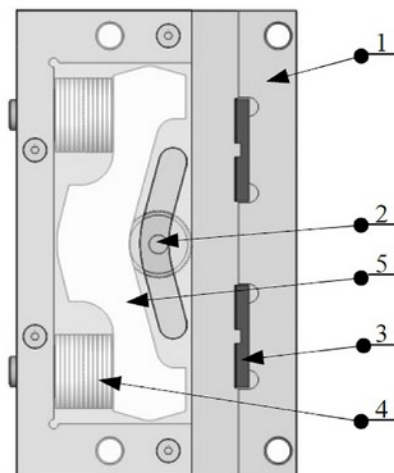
Diagram of CHP2000 type progressive gears: 1 – a body, 2 – a braking roller, 3 – a braking plate, 4 – Belleville springs, 5 – a cam [11]
